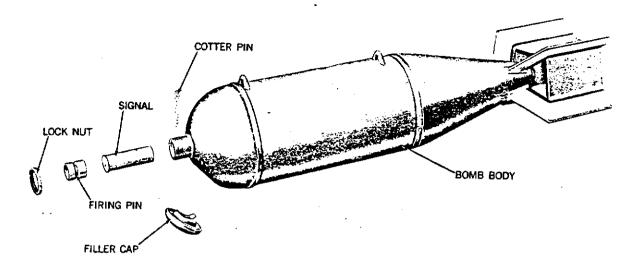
100-lb Practice Bomb Mk 15 Mod 4, Exploded View.
